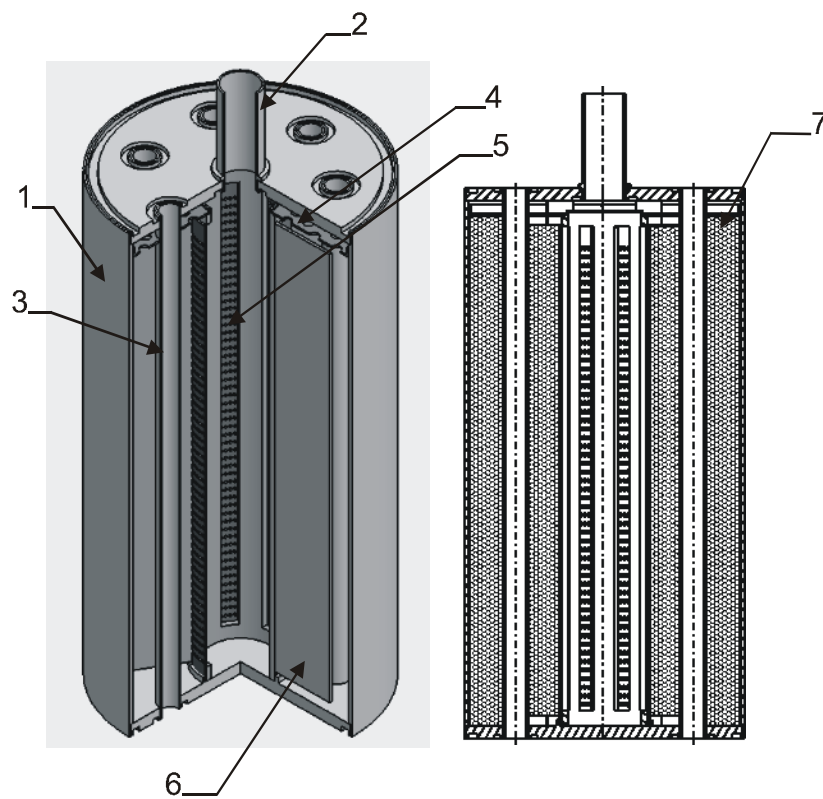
Cryopump layout. 1 – cartridge; 2 – manifold; 3 – pipe; 4, 5 – wire meshes (dust filters); 6 – heat distributor; 7 – adsorbent (activated carbon)
